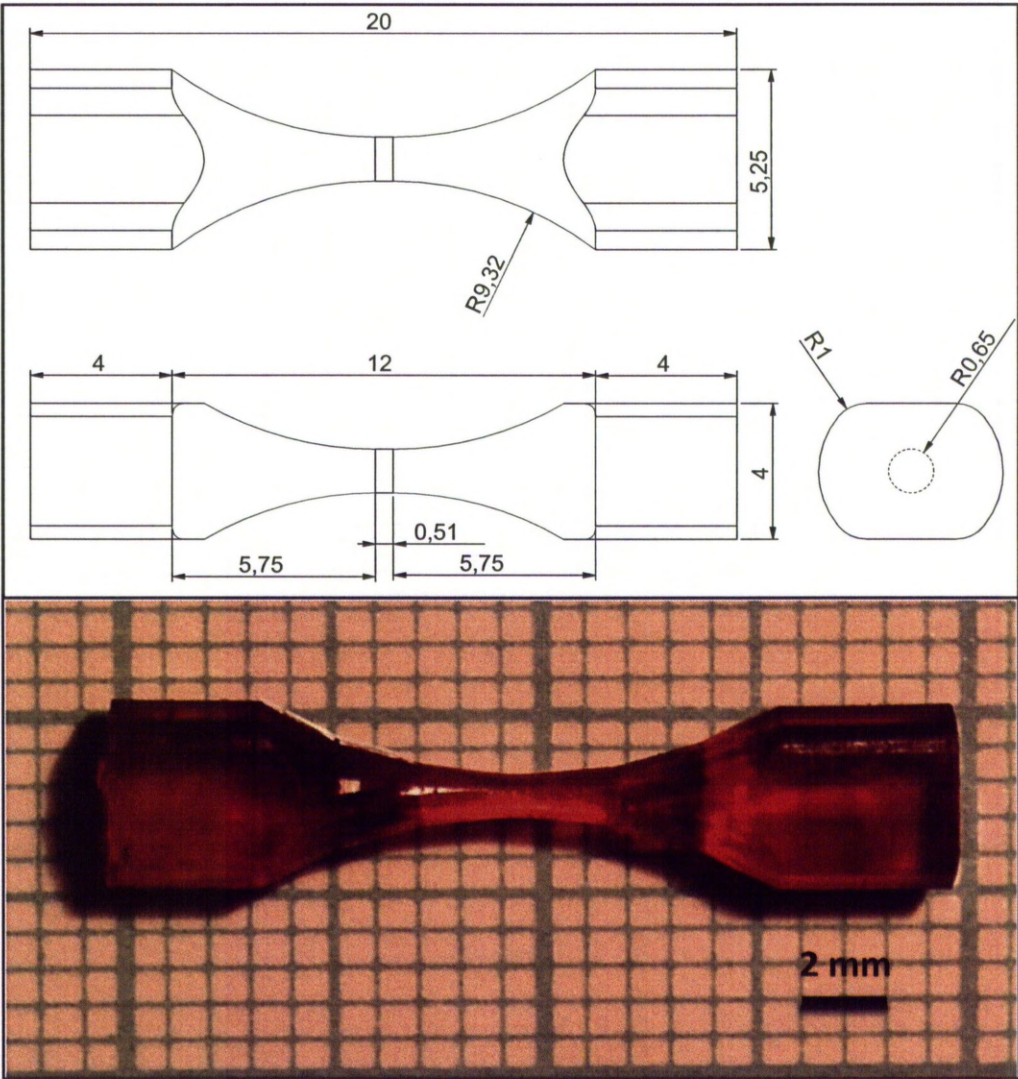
Dimensional Details of Modified Short Gauge Length Tensile Test Specimen.
